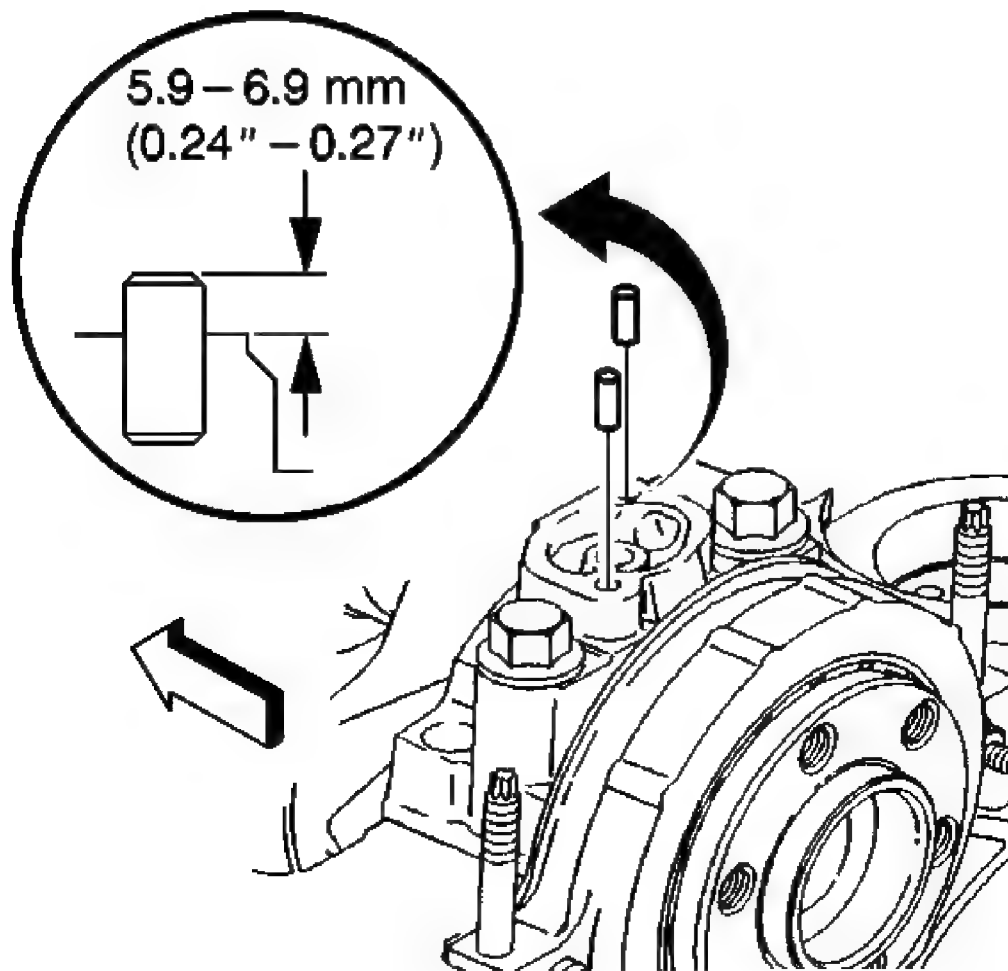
Oil Pump Locator Pins Proper Installation Position
